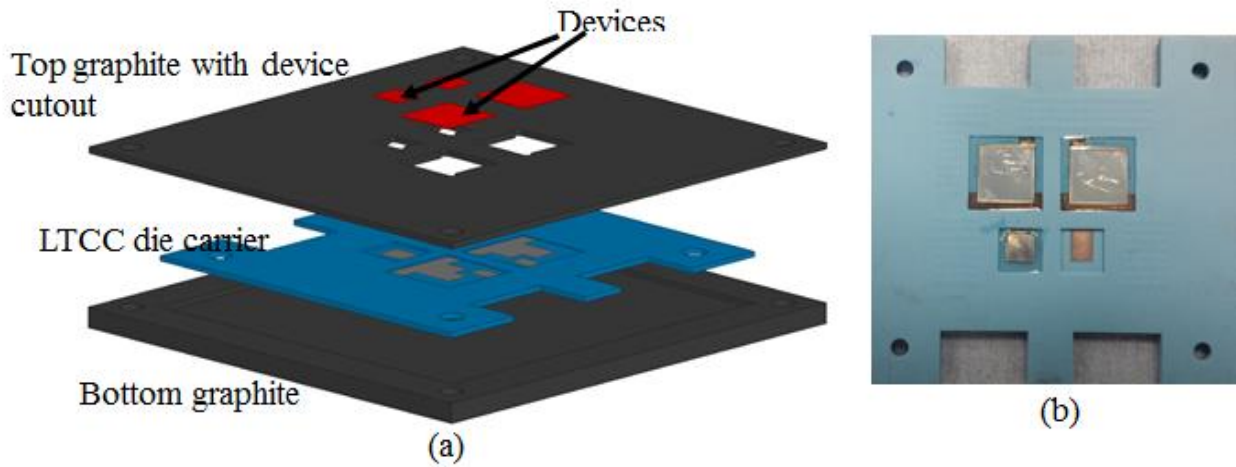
(a) Exploded view of the die attach assembly on LTCC die carrier substrate (b) LTCC die carrier with attached Si-IGBT and SiC Schottky barrier diodes
